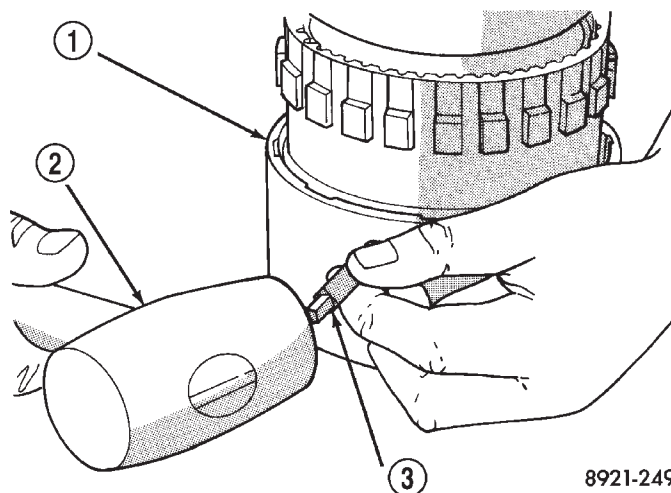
Marking Direct Clutch Drum And Annulus Gear For Assembly Alignment
